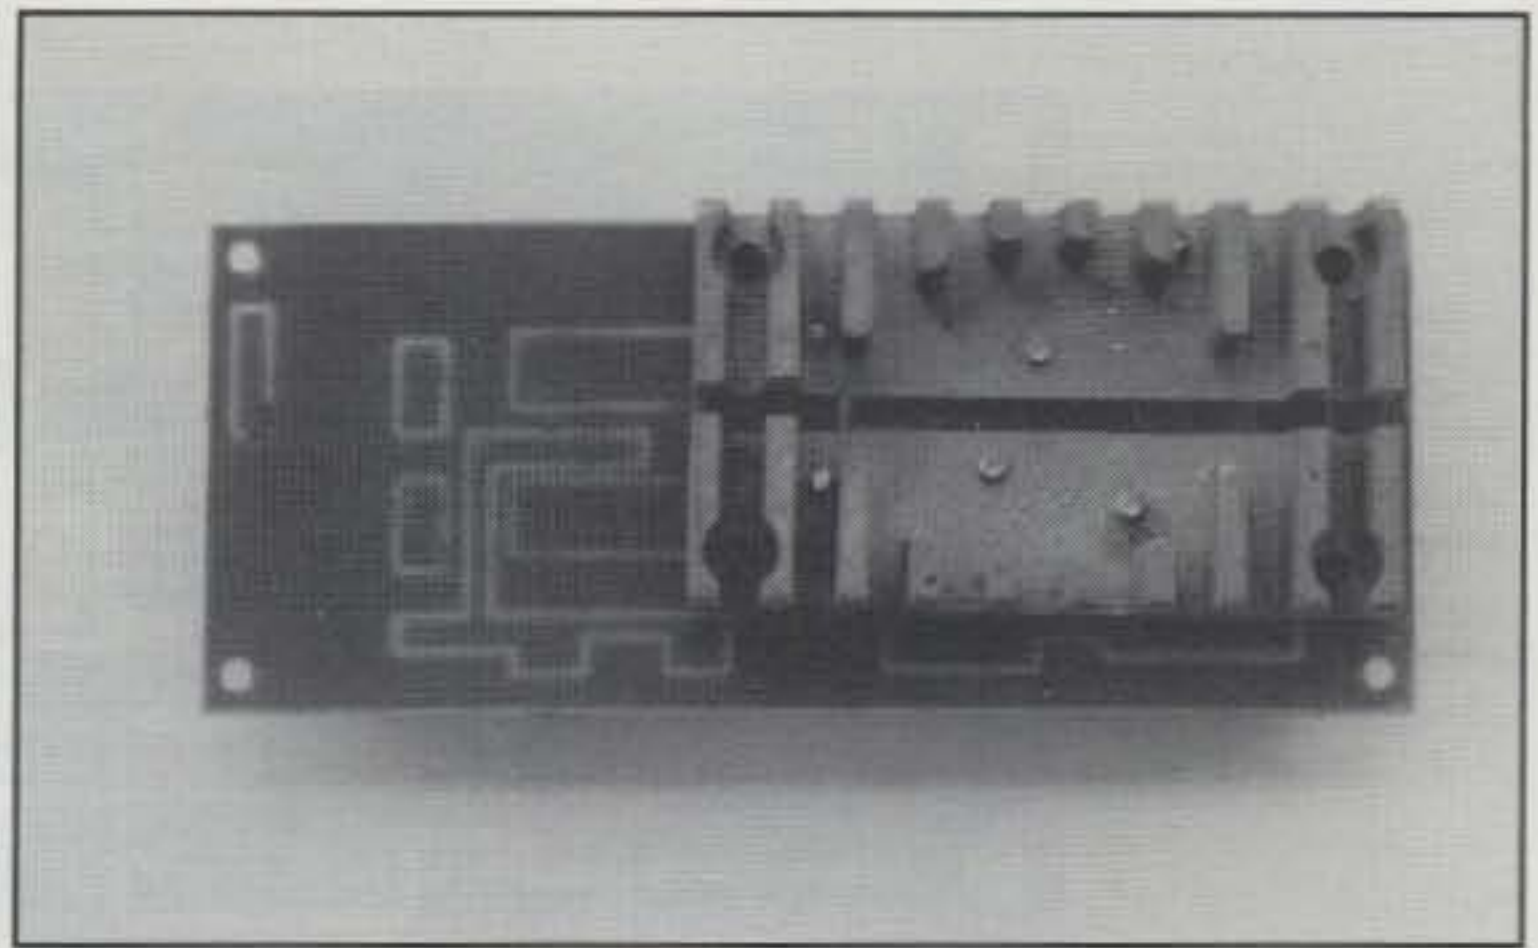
Photograph of the top side of the amplifier PC board showing the heat sinks. A single heavy-duty, extruded heat sink has been cut in half to provide individual sinks for Q1 and Q2 of fig. 1. The heat sinks and their mounting screws must be isolated from circuit ground (see text).
